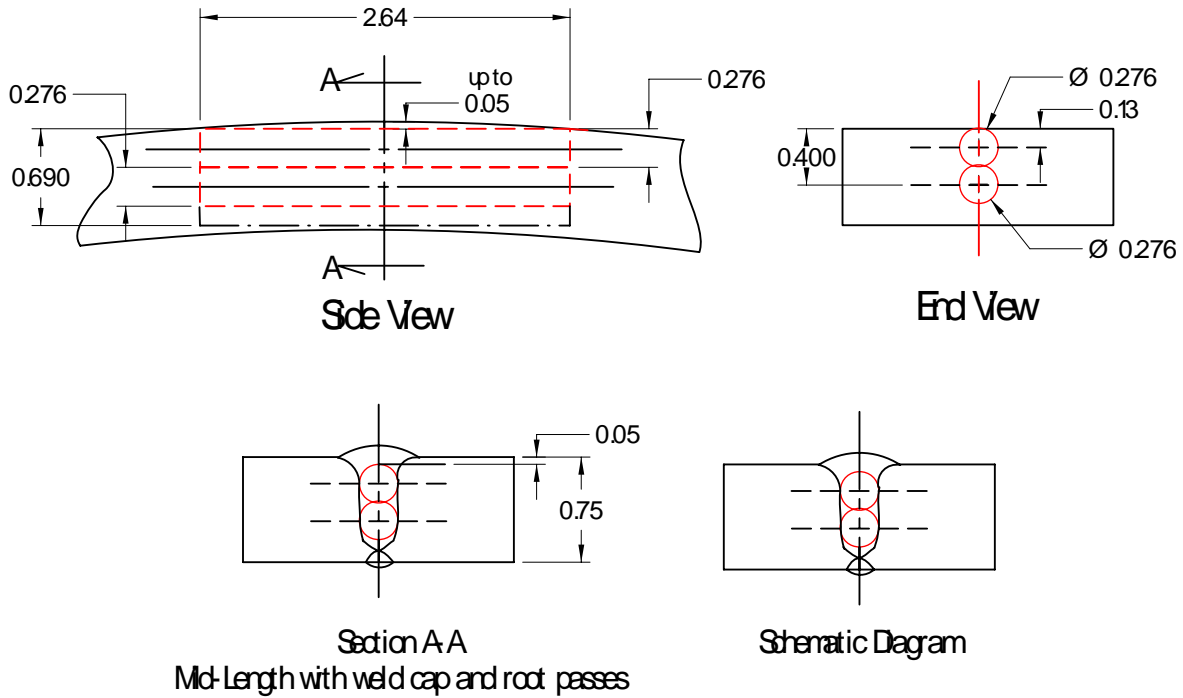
Schematic Showing Weld Cross-sections and Locations of Round Bar Tensiles
